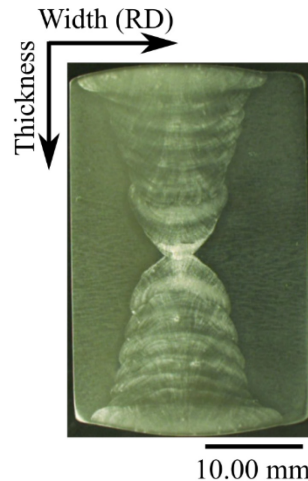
Optical-microcopy image of the Alloy 617 GTAW double-V butt weld profile.
